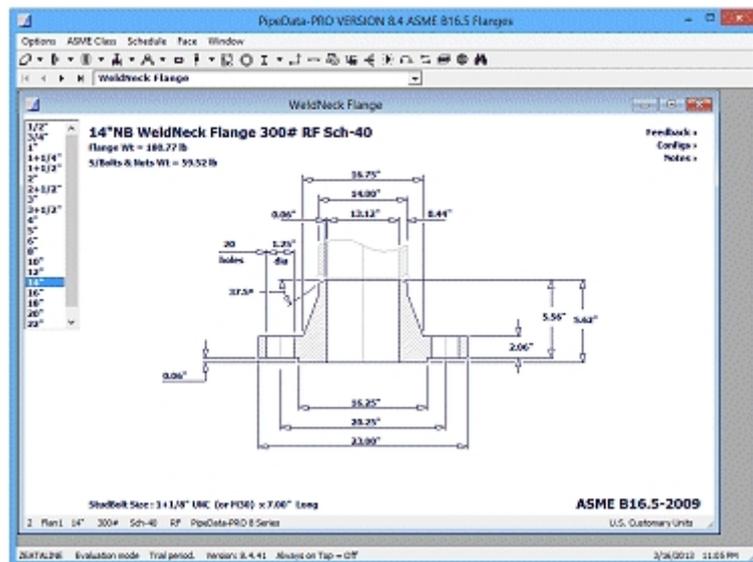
Weld Neck Flange 300# in PipeData-Pro
